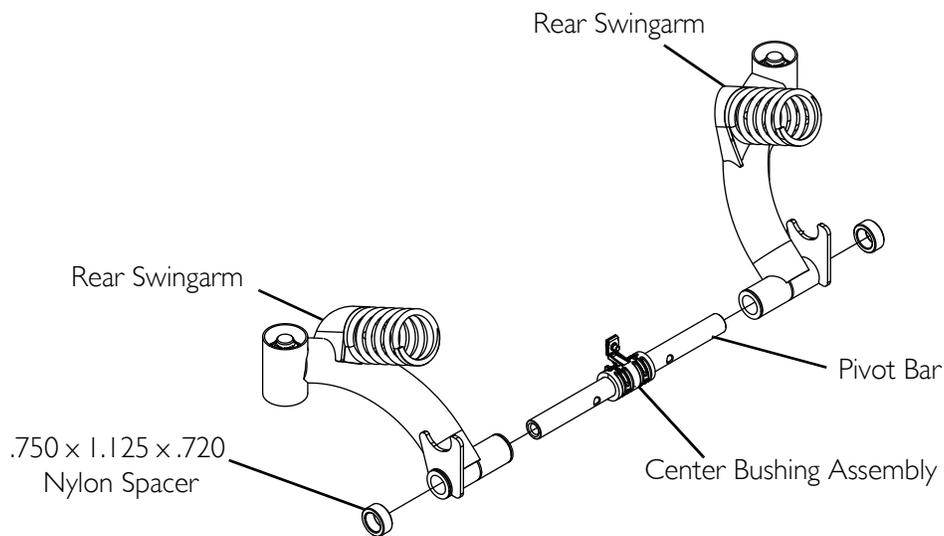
Disassembling/Assembling Rear Suspension Assembly
